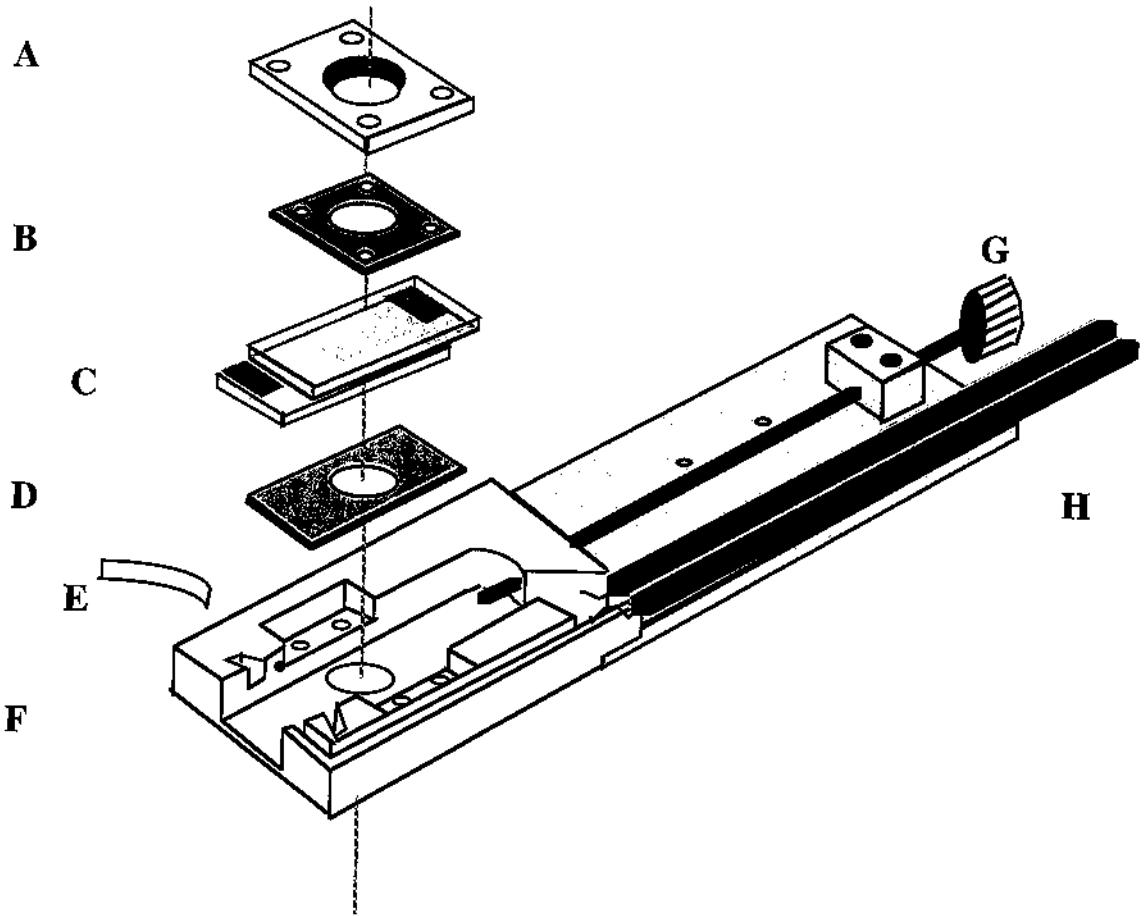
The shearing equipment consists of a massive brass holder F equipped with a lid A. A piece of a silicon rubber D and a piece of mylar B are reducing the friction and thereby ensuring the smoothness of the shearing movement. The shearing force is applied to the upper glass plate of the cell C by the shearing rod G. The spring E is creating the return force.
